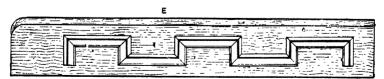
Side Piece of Correr Pedestal Cupboard.
